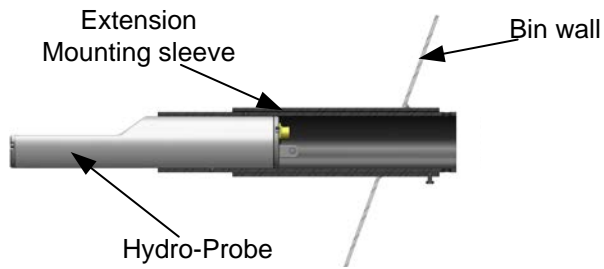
Hydro-Probe installed in an Extension Mounting Sleeve
